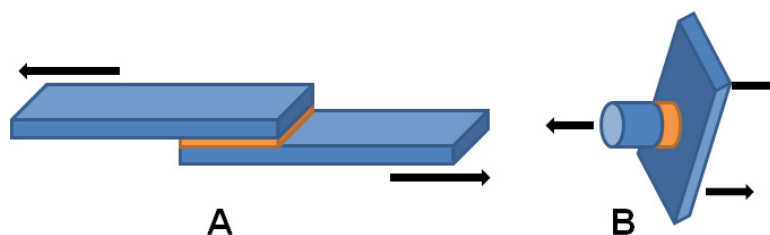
, Adhesive assemblies: (A) single-lap and (B) Dolly-to-surface
